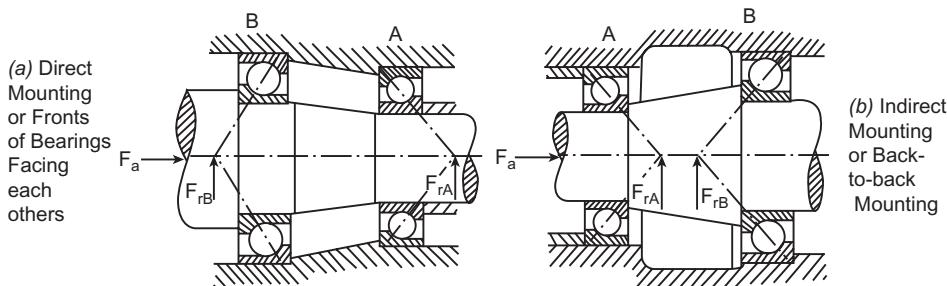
Angular contact ball bearings mounted on a single shaft.
